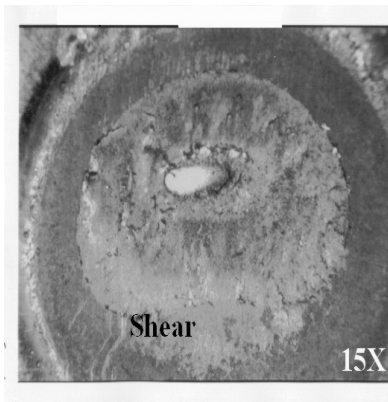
D-7: Tensile shear strength of single spot welds.^{L-4}
